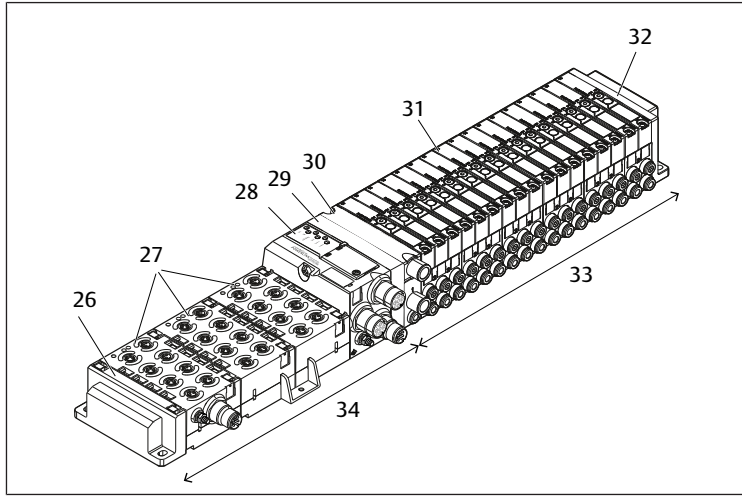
Example configuration: unit consisting of AES series bus coupler and I/O modules, and AV series valves
